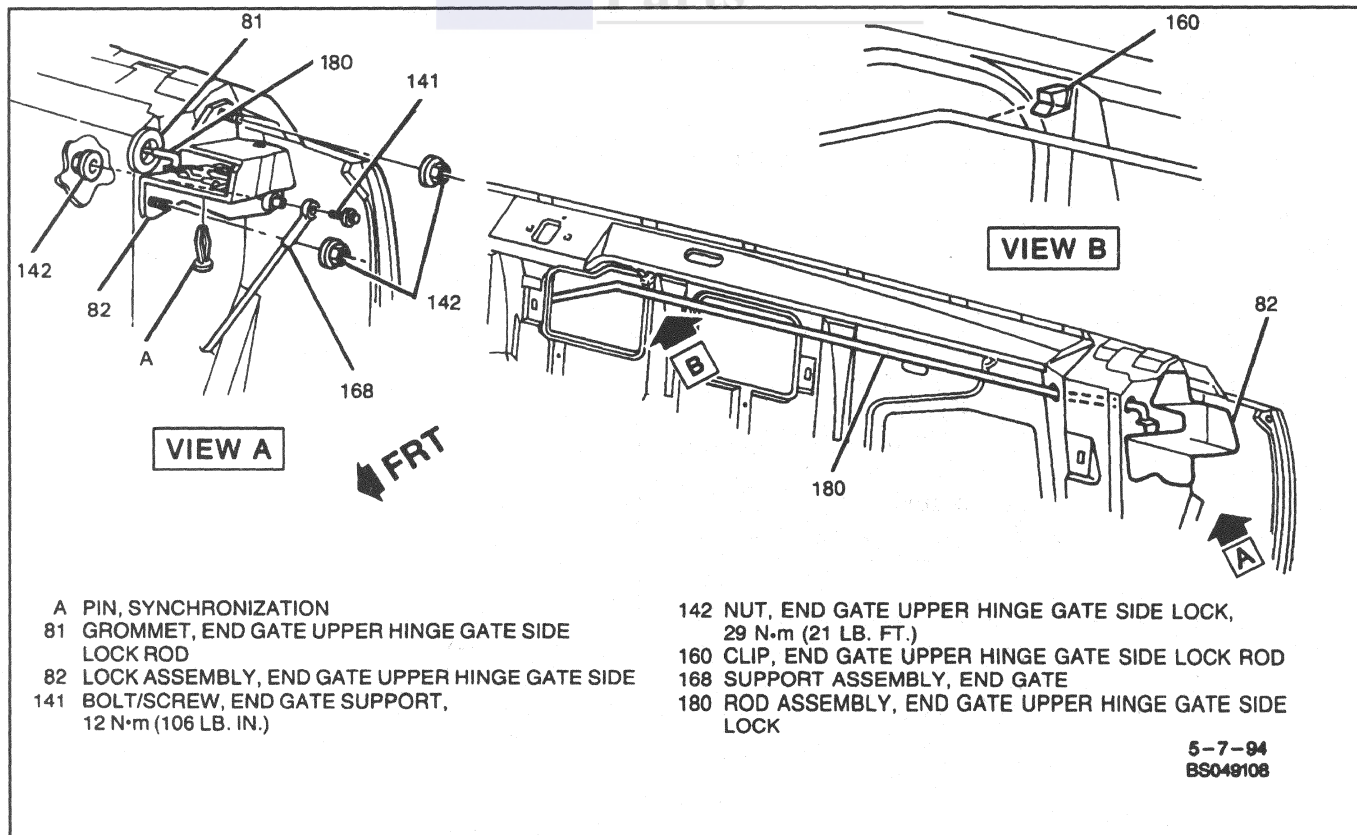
Upper Hinge Gate Side Lock-(Left Side)
